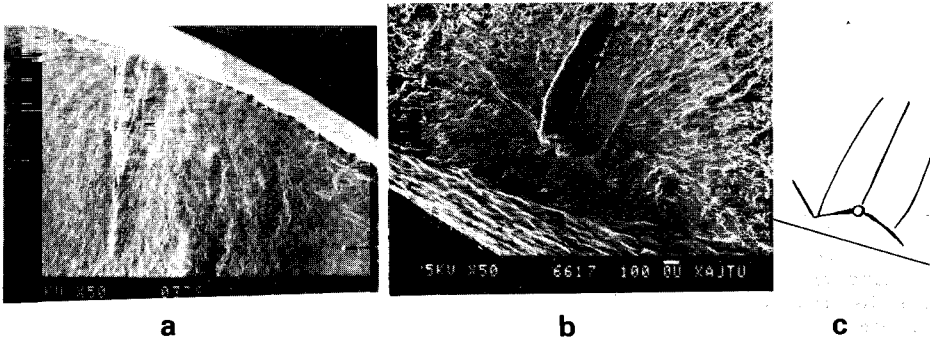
fatigue crack origin area, a, Ground specimen, b, shot peened specimen, c, Sketch of b.
